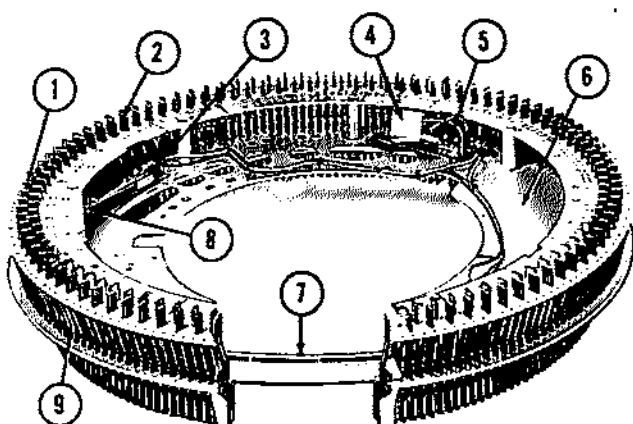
SELECTOR PLATE AND LATCH PIN ASSEMBLY - 2600
